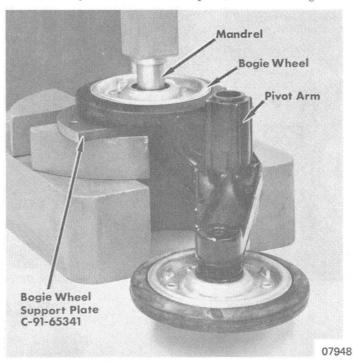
Pressing Bogie Wheel Off Tubing or Arm
